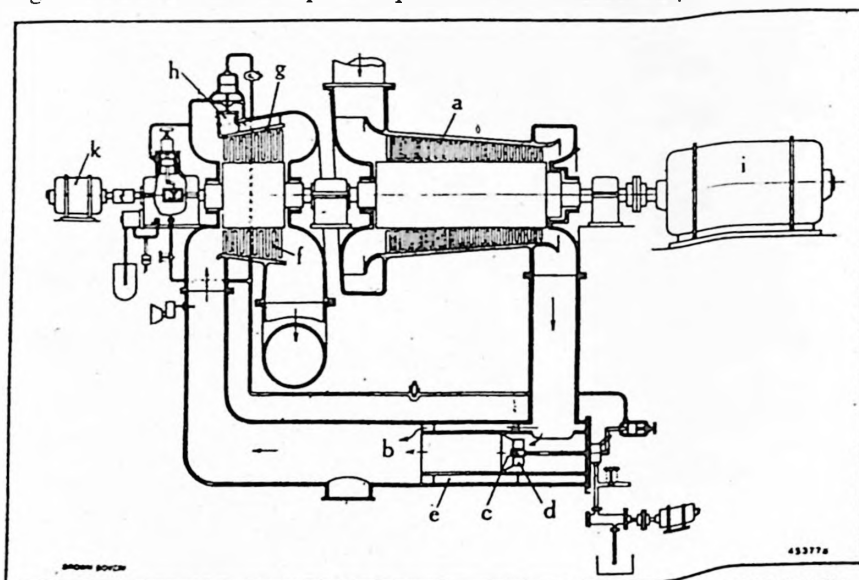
Simple Gasturbine Driving Generator. a. Axial compressor; b. Combustion chamber; c. Ignition point; d. Burner; e. Burner jacket; f. Gas-turbine blading; g. Reaction type gas turbine; h. By-pass safety valve; i. Electric generator; k. starting motor.
